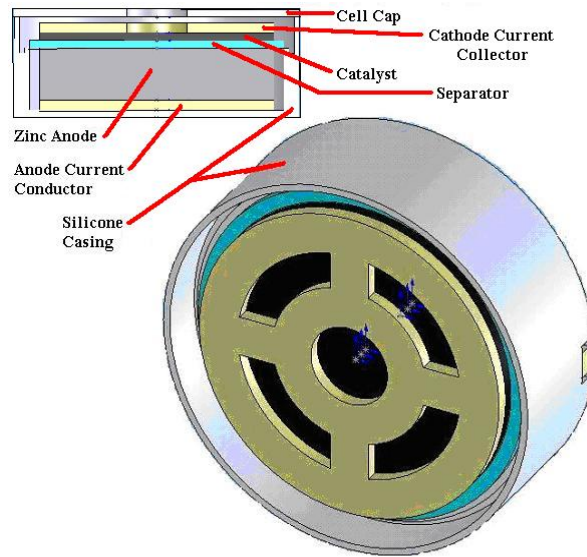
CAD model of standard cylindrical freeform fabricated battery; cutaway showing components (inset), and exterior view revealing cathode conductor, catalyst, and separator (cap hidden for clarity).
